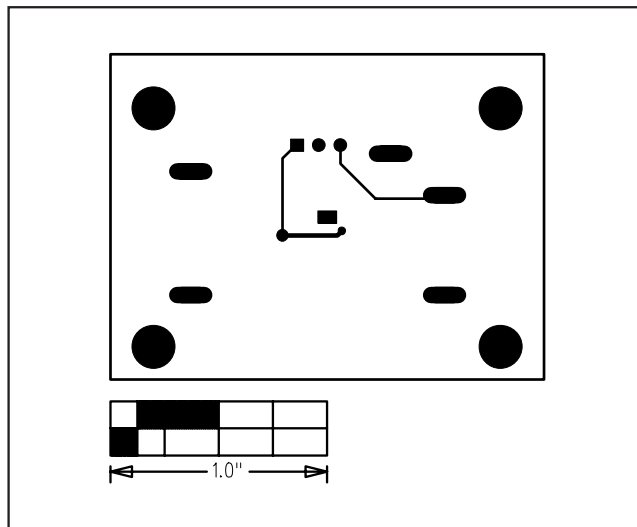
MAX1947 EV Kit PC Board Layout—Solder Side
